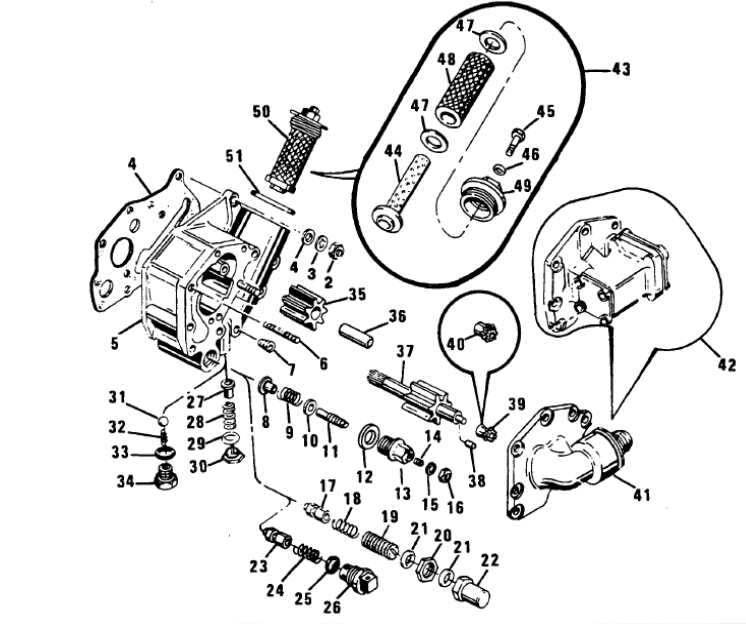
OIL PUMP ASSEMBLY
